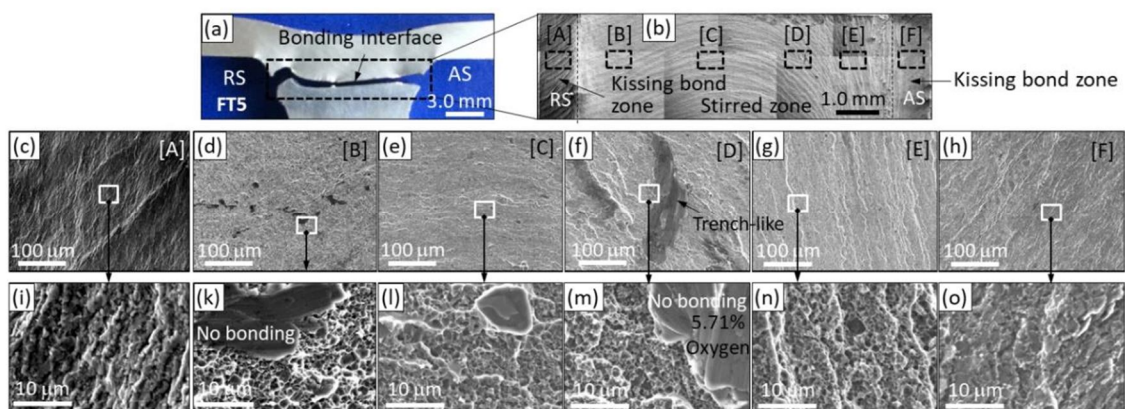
(a) Fracture location and (b-o) fractography of FT5 at welding rate of 100 mm/min.
